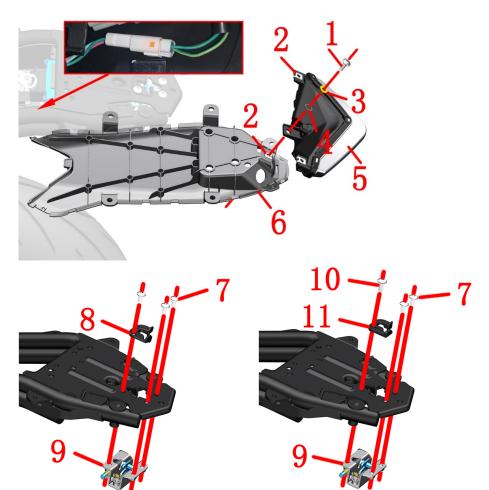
REAR COVER COMPONENT		Tail lights, tail skirt components	CHK	(0)
